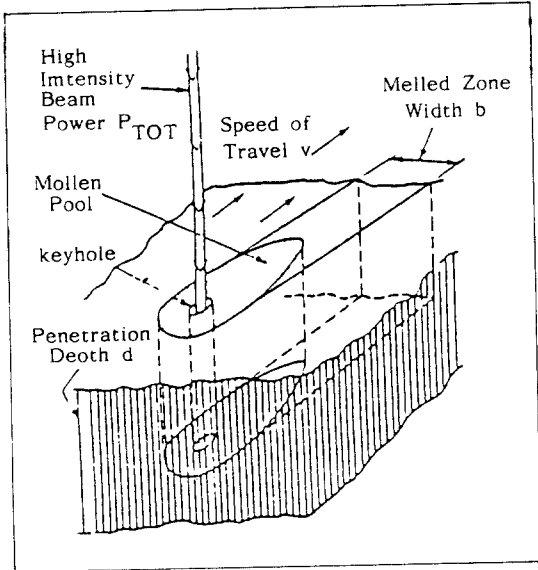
Penetration weld geometry (Swifhook and Cjick (1973))
